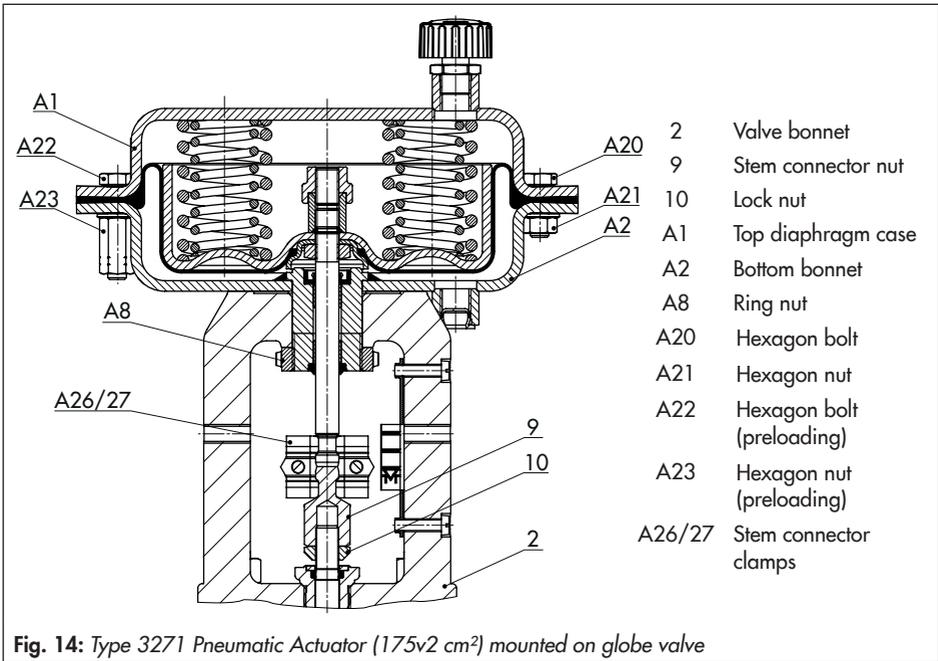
Type 3271 Pneumatic Actuator (175v2 cm<sup>2</sup>) mounted on globe valve
